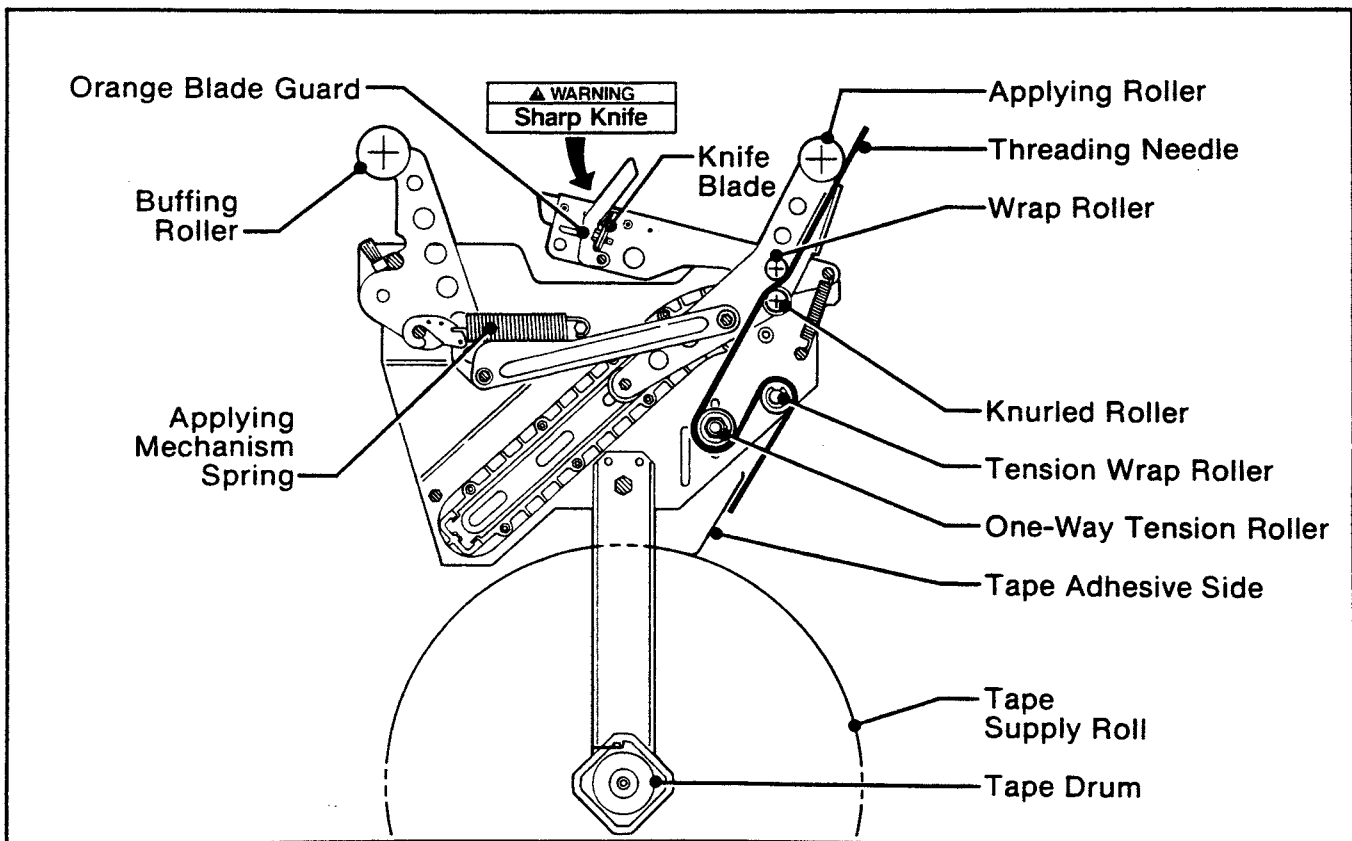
Tape Threading Diagram - Lower Taping Head - Left Side View
